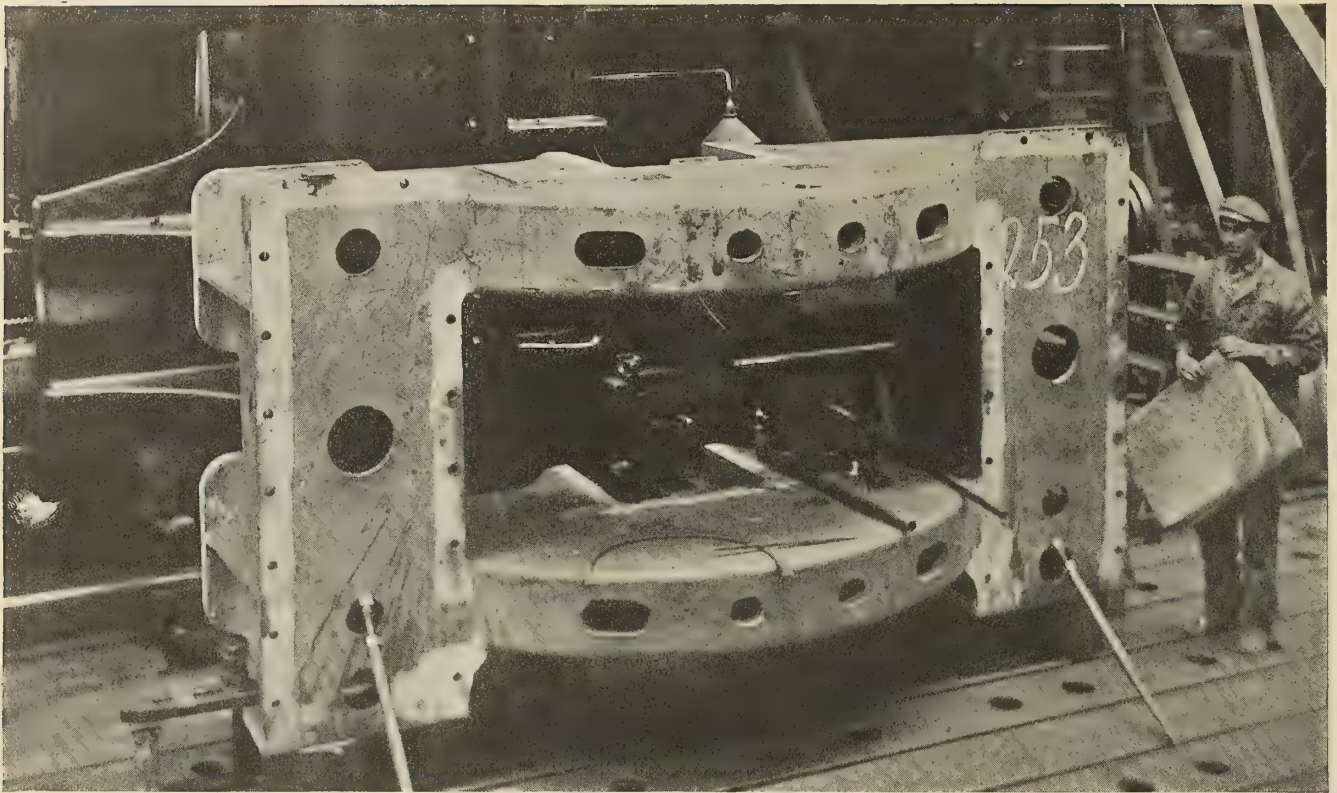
Section of Bedplate Set Up on Wall Planer Where the Recesses for the Main Bearings Are Machined
